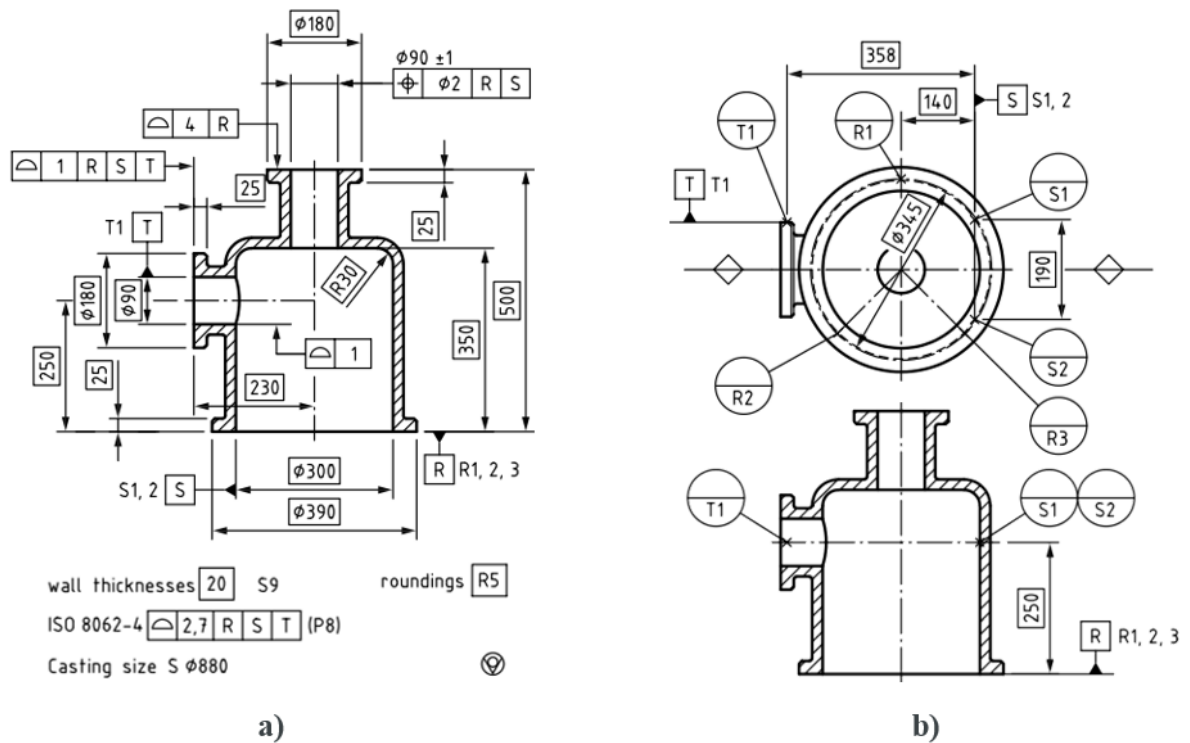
Example drawing. A) drawing indication according to ISO 8062-4, b) datum system RST definition. [17]
